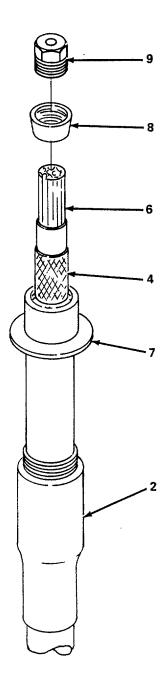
Communications Cable, Fabrication (Sheet 2 of 6).
